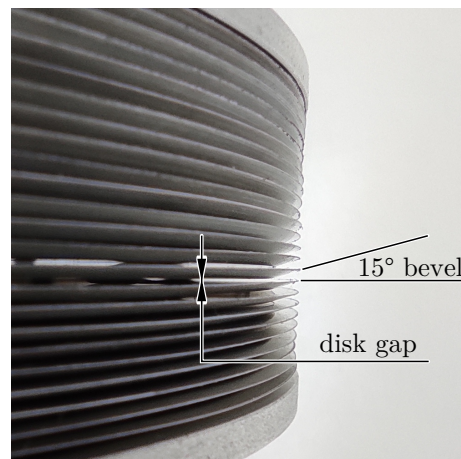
Detail view of the rotor inlet with bevelled disk edges.
